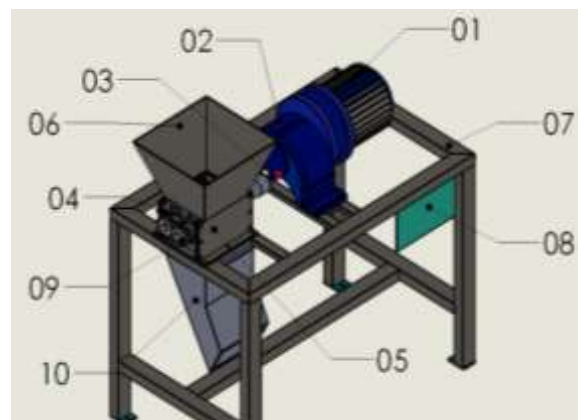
Finally assembled hopper ,outlet and electric power switch box on the frame
